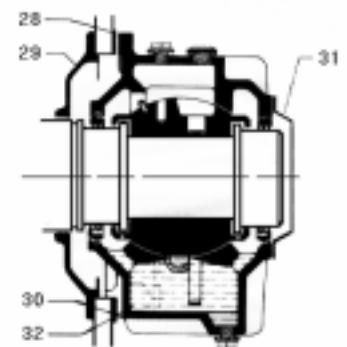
Ring-lubricated flange-type sleeve bearings(examples, delivered design may deviate in details)
